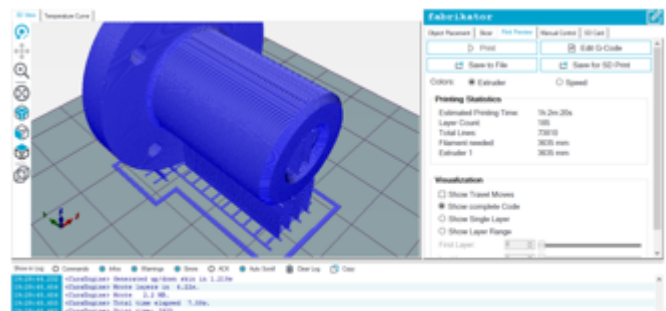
Linear supports for 3D printed part in Repetier Hos
